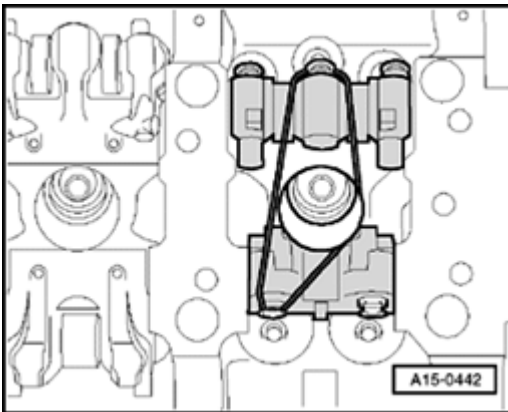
Turning Roller Rocker Lever Upward And Securing With A Rubber Band
